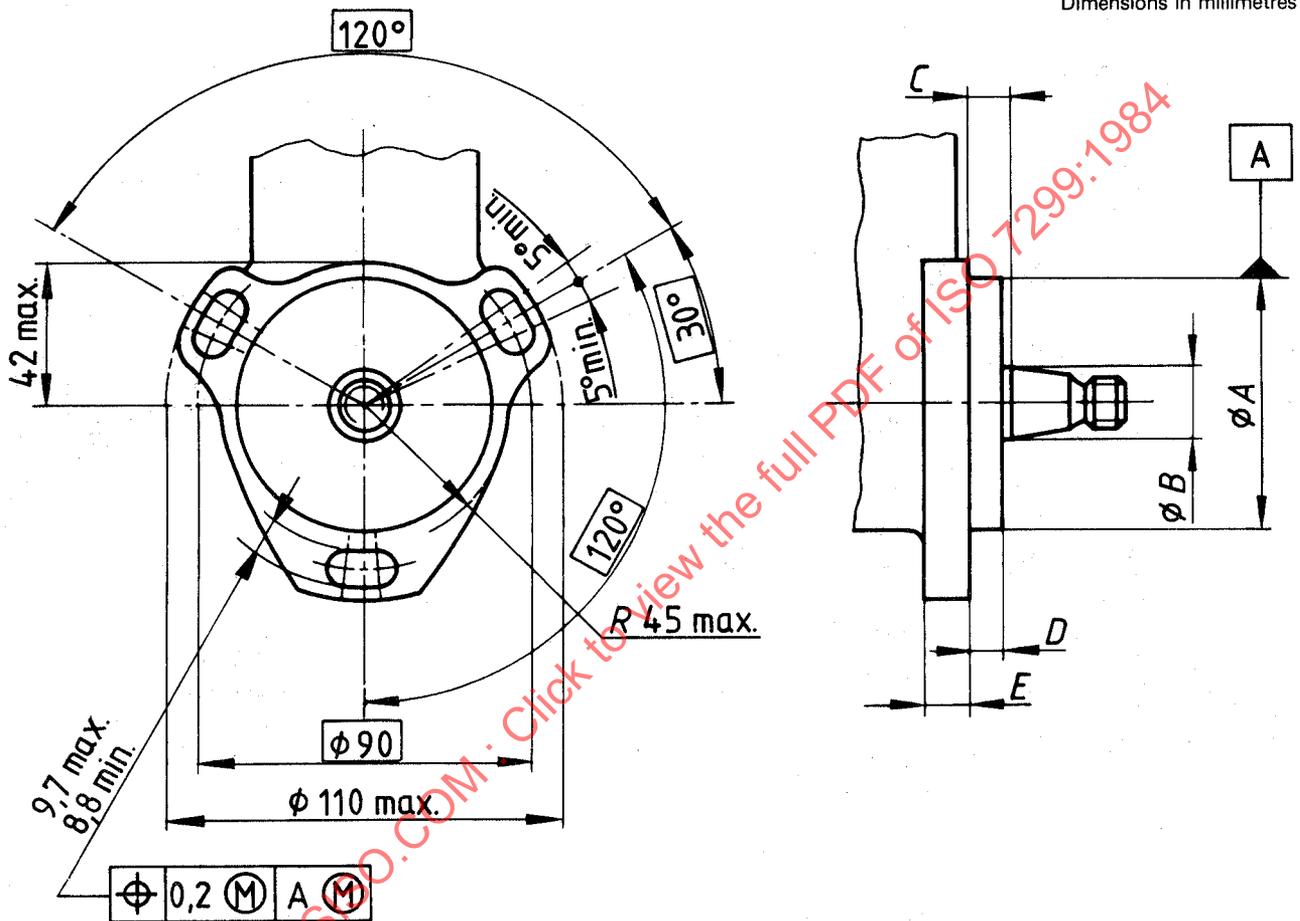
In-line fuel injection pumps — Type 4 end-mounting flange
